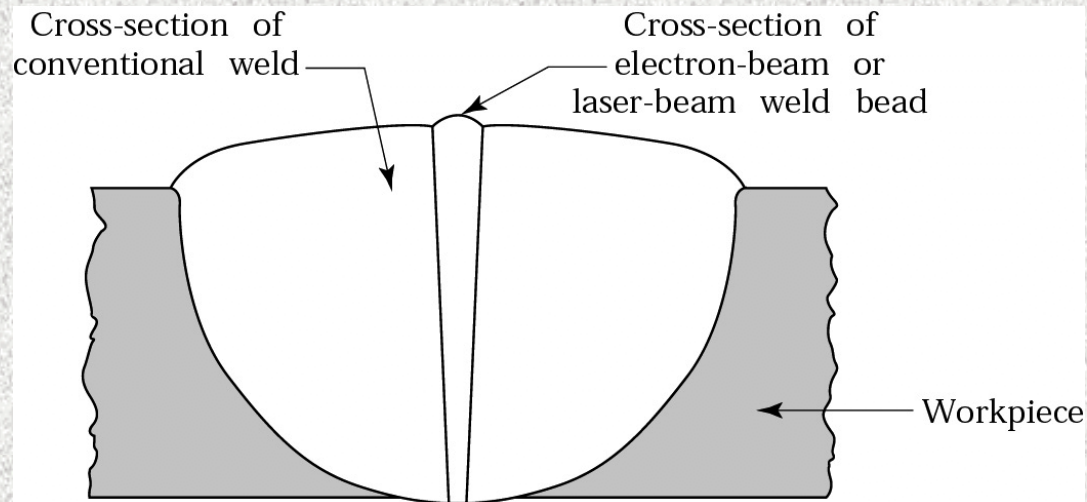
The relative sizes of the weld beads obtained by conventional (tungsten arc) and by electron-beam or laser-beam welding.
